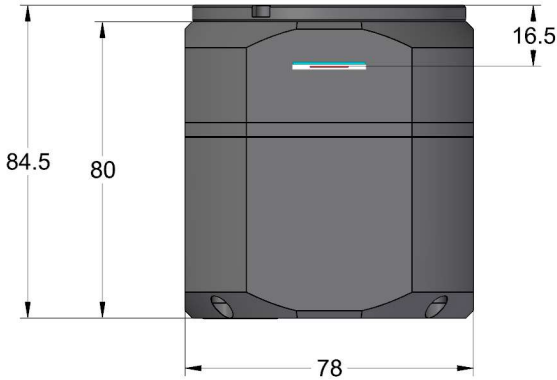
C1+ camera head with C2 compatible adapter side view dimensions
